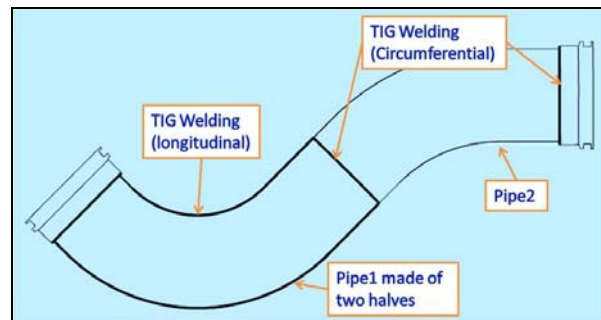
Pipeline Assembly welded with multiple parts.
